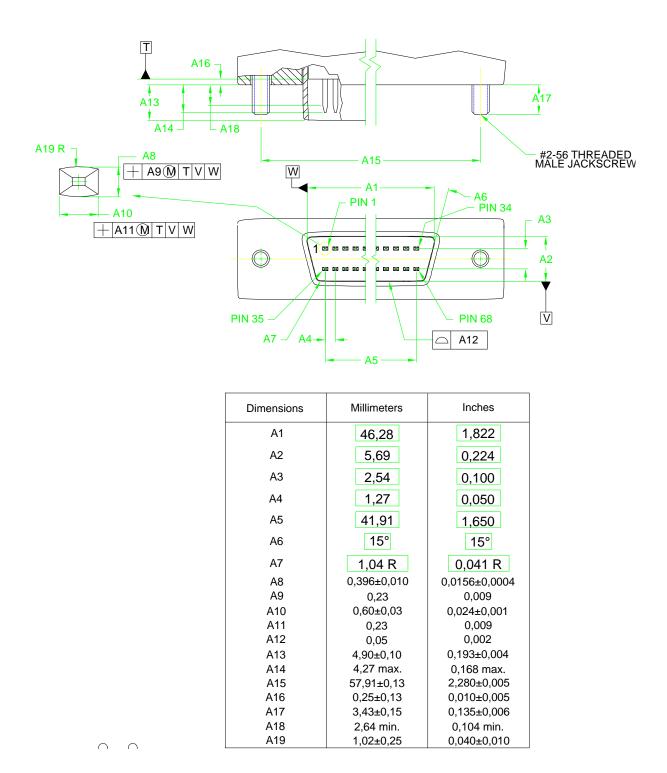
68-contact alternative 3 shielded mating connector (P cable/Q cable)
